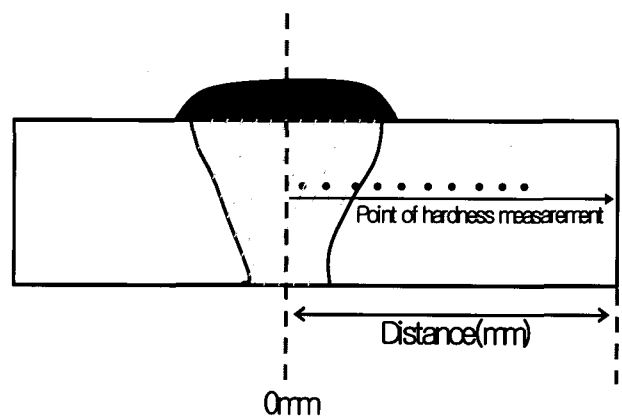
Test specimen of weldment zone cut with a right angle against welding direction
